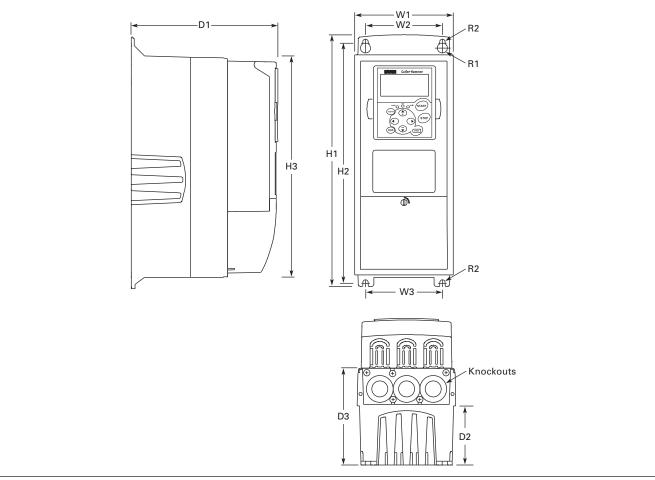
NEMA Type 1 and NEMA Type 12 HVX9000 Drive Dimensions, FR4, FR5 and FR6
